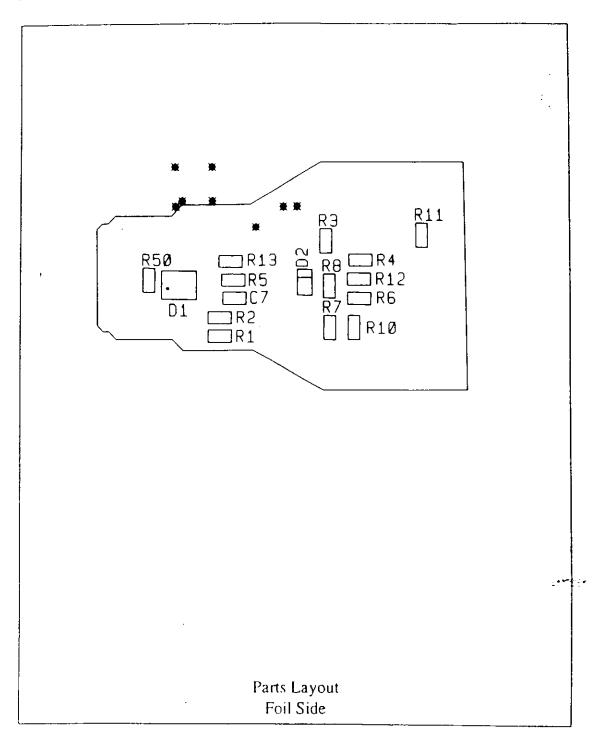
Parts layout drawings of the Mini-Lynx 20W/728
